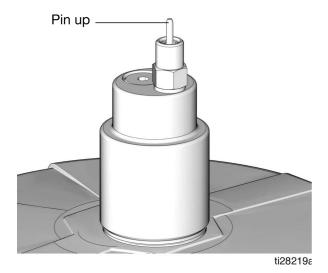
Auto-Fill Shutoff Valve with Pin Up
